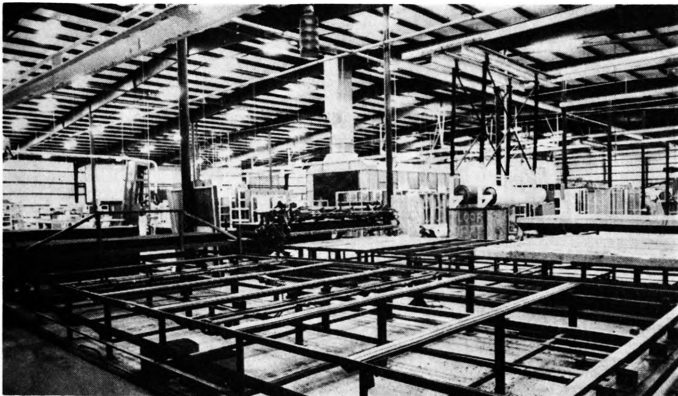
Floor Sub-Assembly Station (Twin Lakes Manufacturing Co., Tampa, Fla.)
